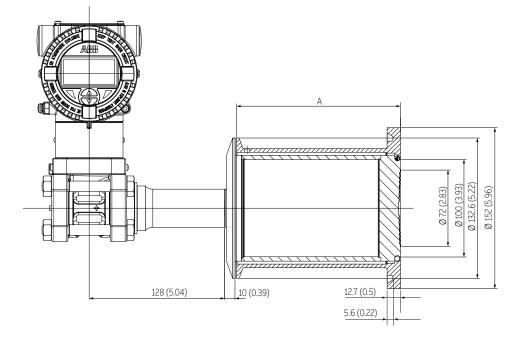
266DRH with barrel housing and direct mount seal S26SS Sanitary extended (For dimensions of S26 seals refer to the S26 datasheet)
